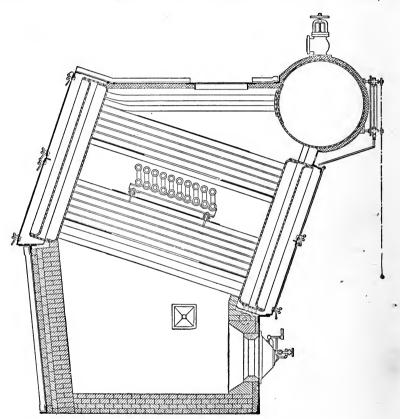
Foster water-tube boiler fitted for oil burning.
